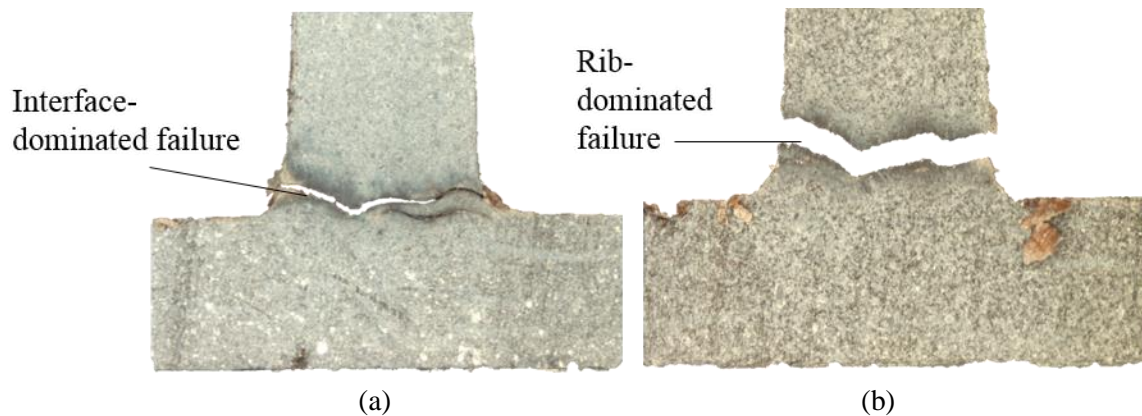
Fracture pattern in ribbed plate mechanical specimens at low holding pressure (a) and at high holding pressure (b).
